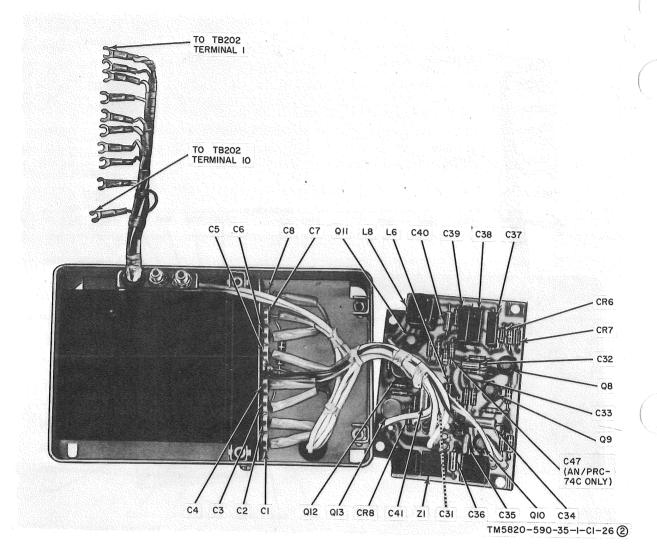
IF audio module front view, component boards removed (part 2 of 2).
